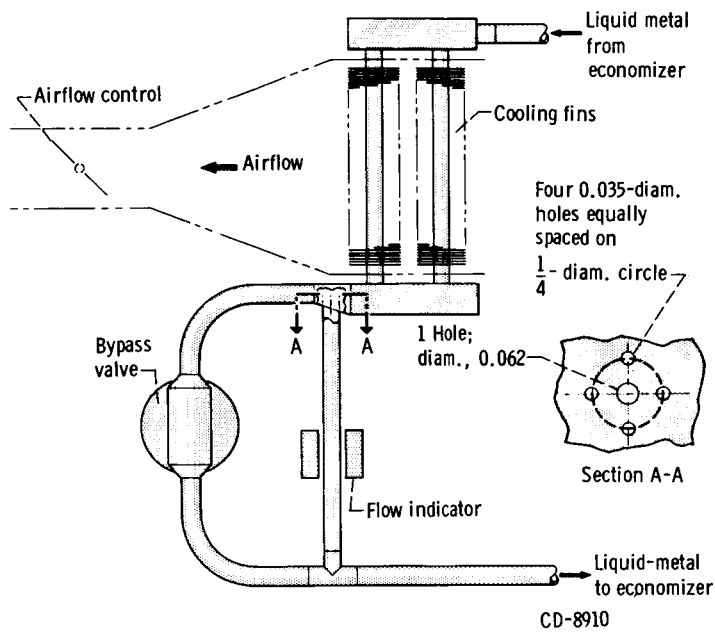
Plugging indicator. (All dimensions are in inches.)
